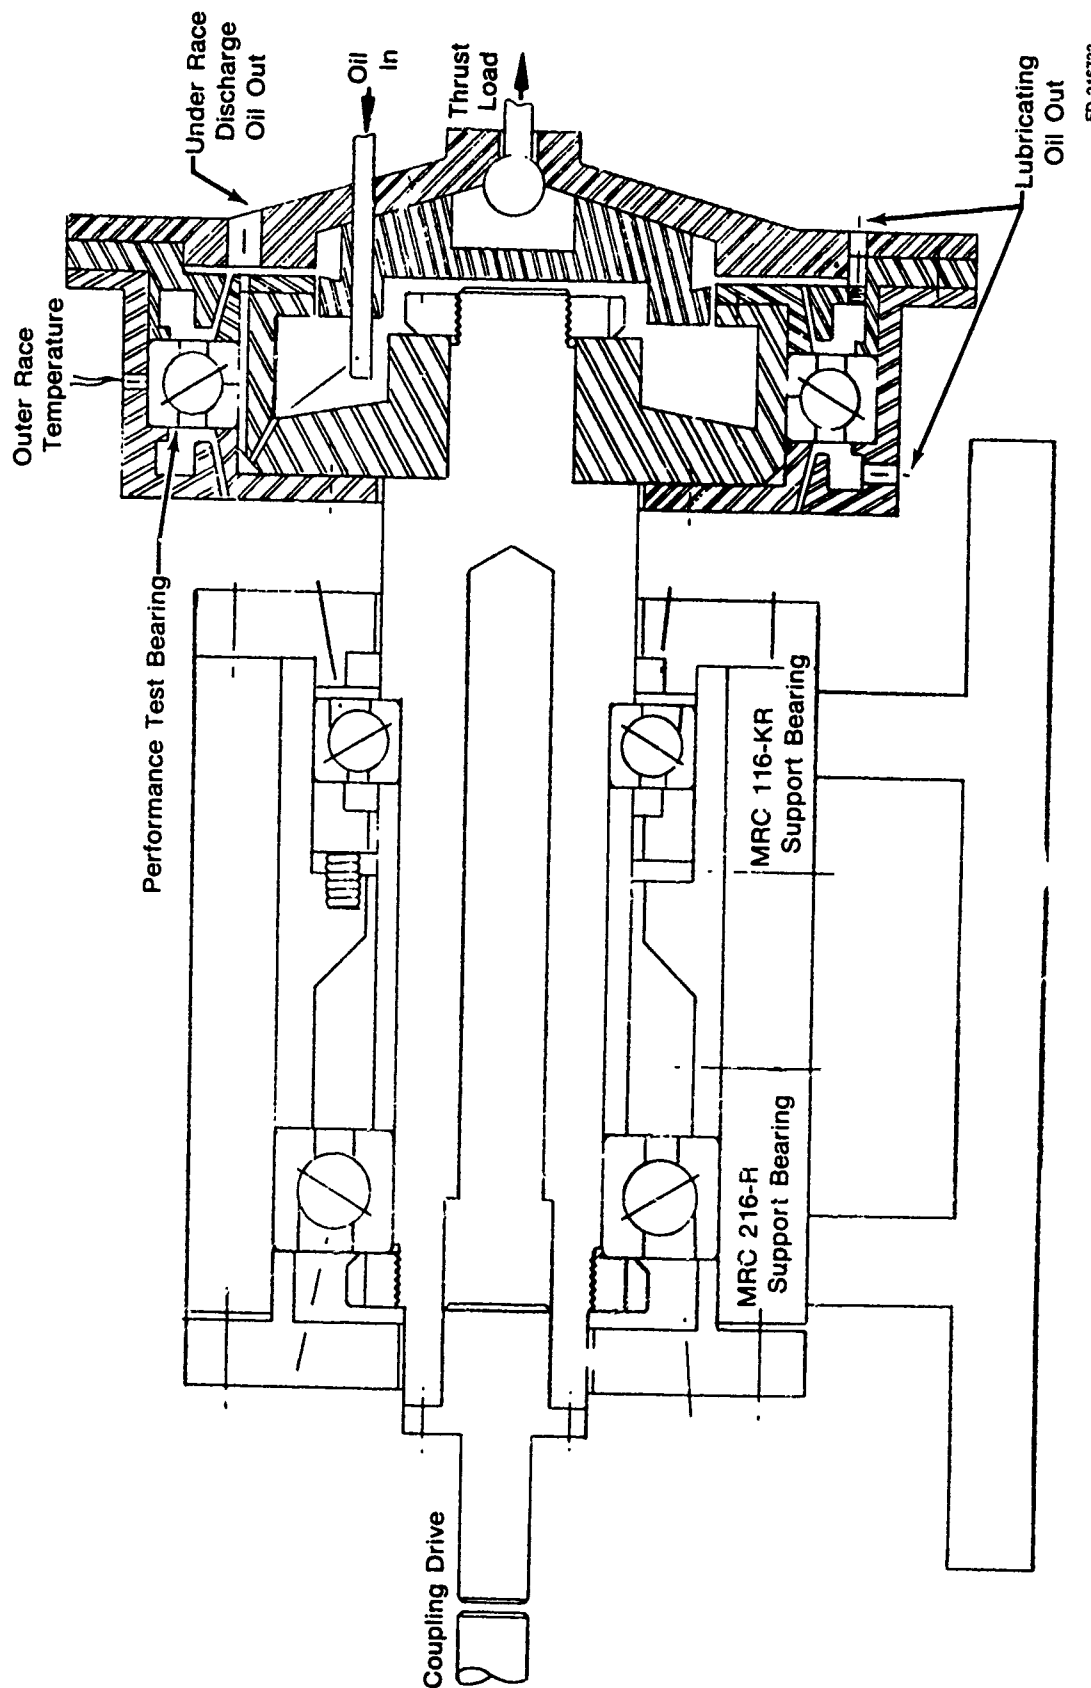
Schematic of Test Rig for Performance Testing Aircraft Turbine Engine Thrust Bearings
